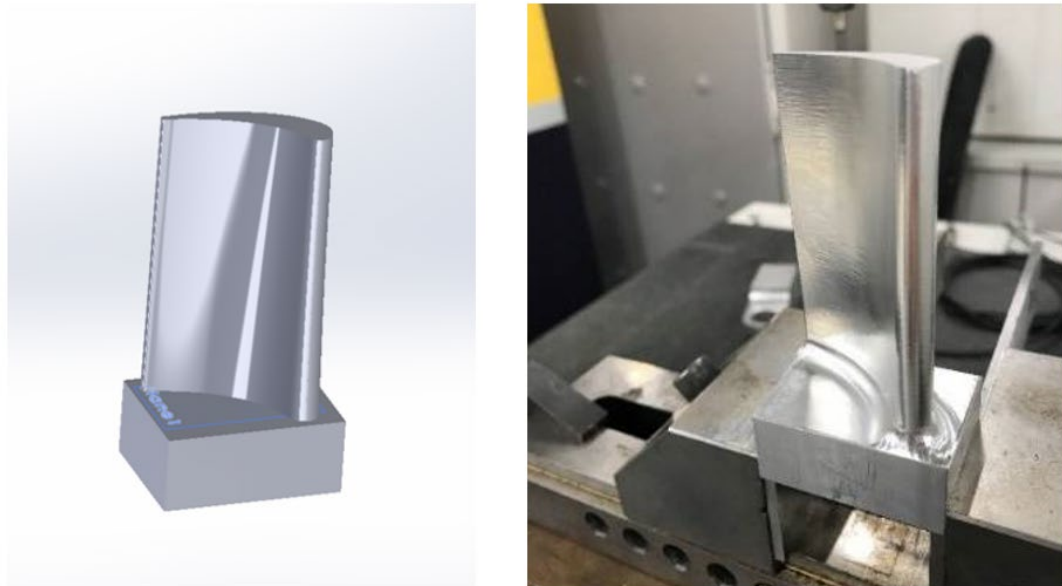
Specimen Used in Case Study - a) CAD Model b) Manufactured Part
